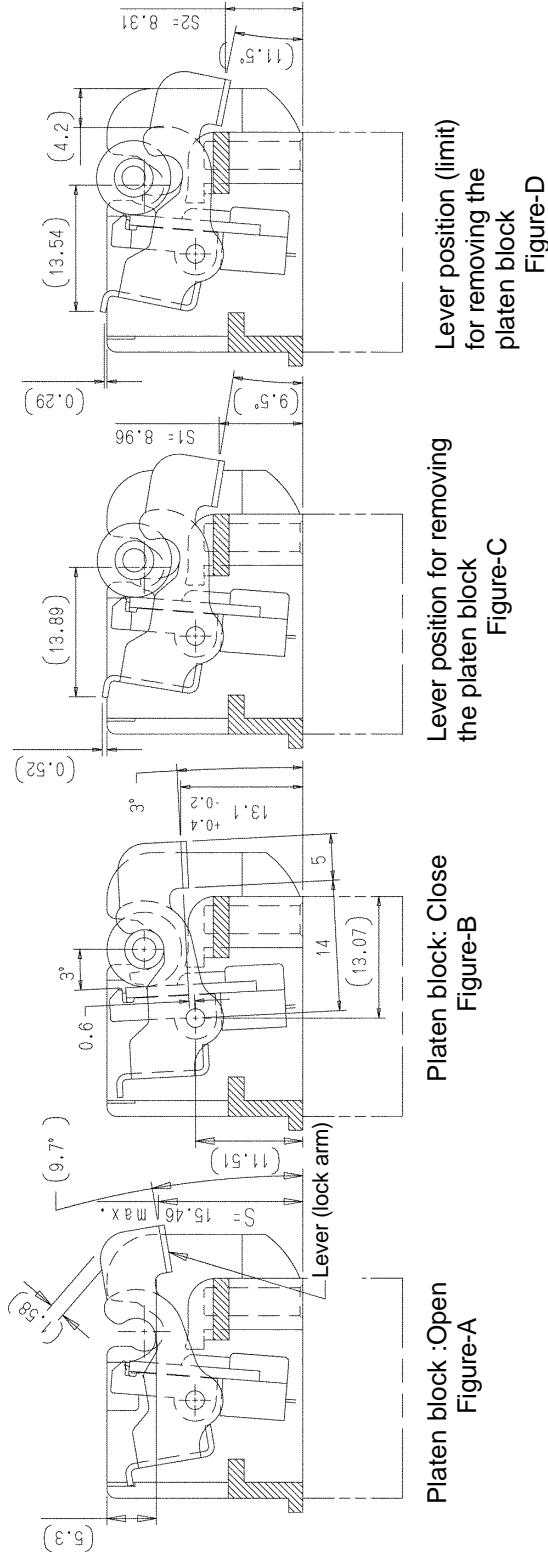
Lever of LTPA245C Lock Arm and Head Block Operations
